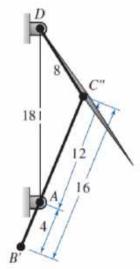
Movement Mechanism for Conveyor Segment Minimum Position
